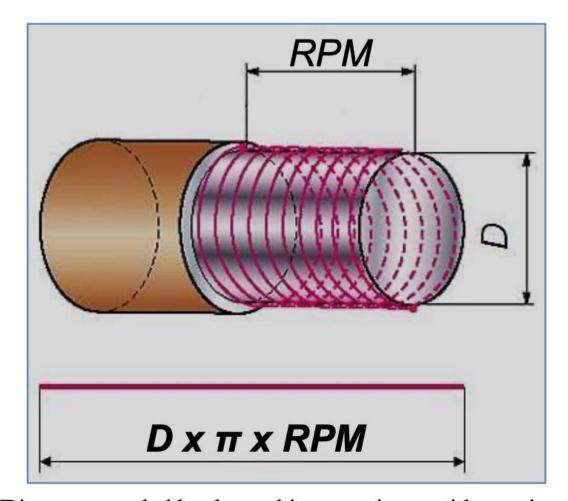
Distance traveled by the tool in one minute with rotating workpiece
